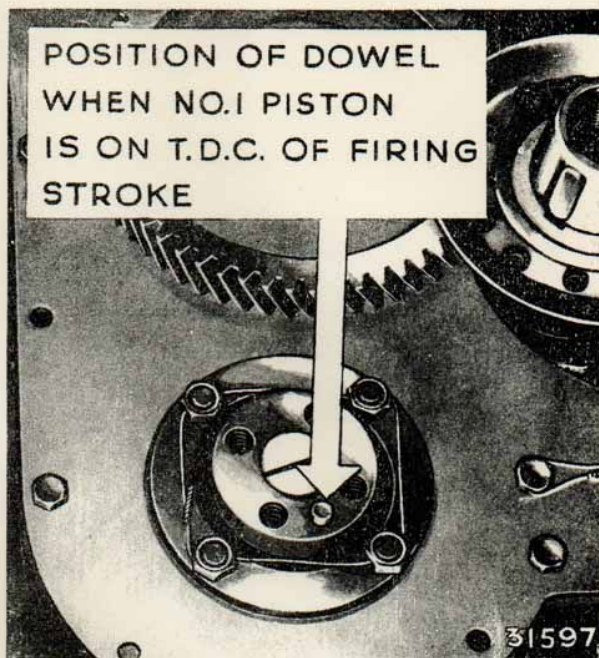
GEAR LOCATION IN CAMSHAFT END.
